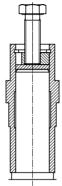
Gear unit mounted to shaft without a shoulder using the fastening element
